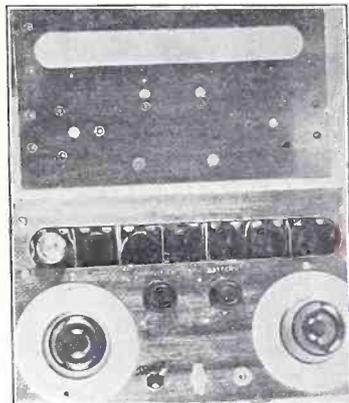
, the 7x12" which has been laid out from the blueprint, which was pasted down on the wood. Notice the panel is wood. Fig. 16 (bottom) is the view of the panel, with all parts in place. The toggle switch is in lower center.
